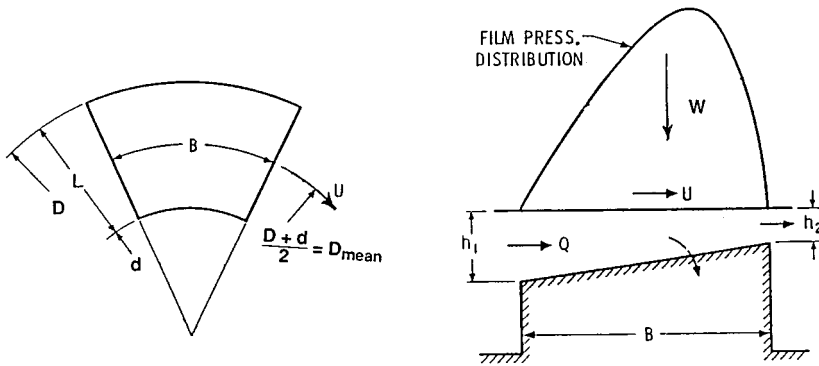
Sector for tapered land thrust bearing.
